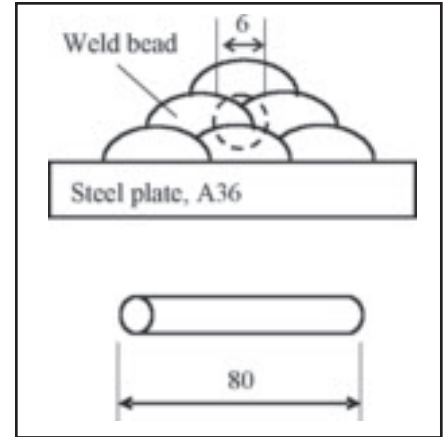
Cylindrical specimens according to the Gleeble standard specimen were extracted from the welds. (All dimensions are given in mm.)
